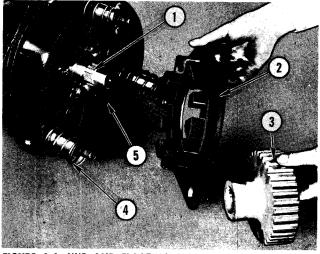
HUB AND FLOATING PLATE, REMOVED
